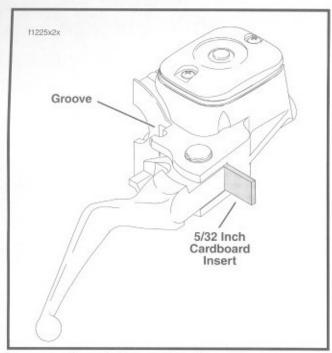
Install Cardboard Insert Before Installing Master Cylinder Assembly
